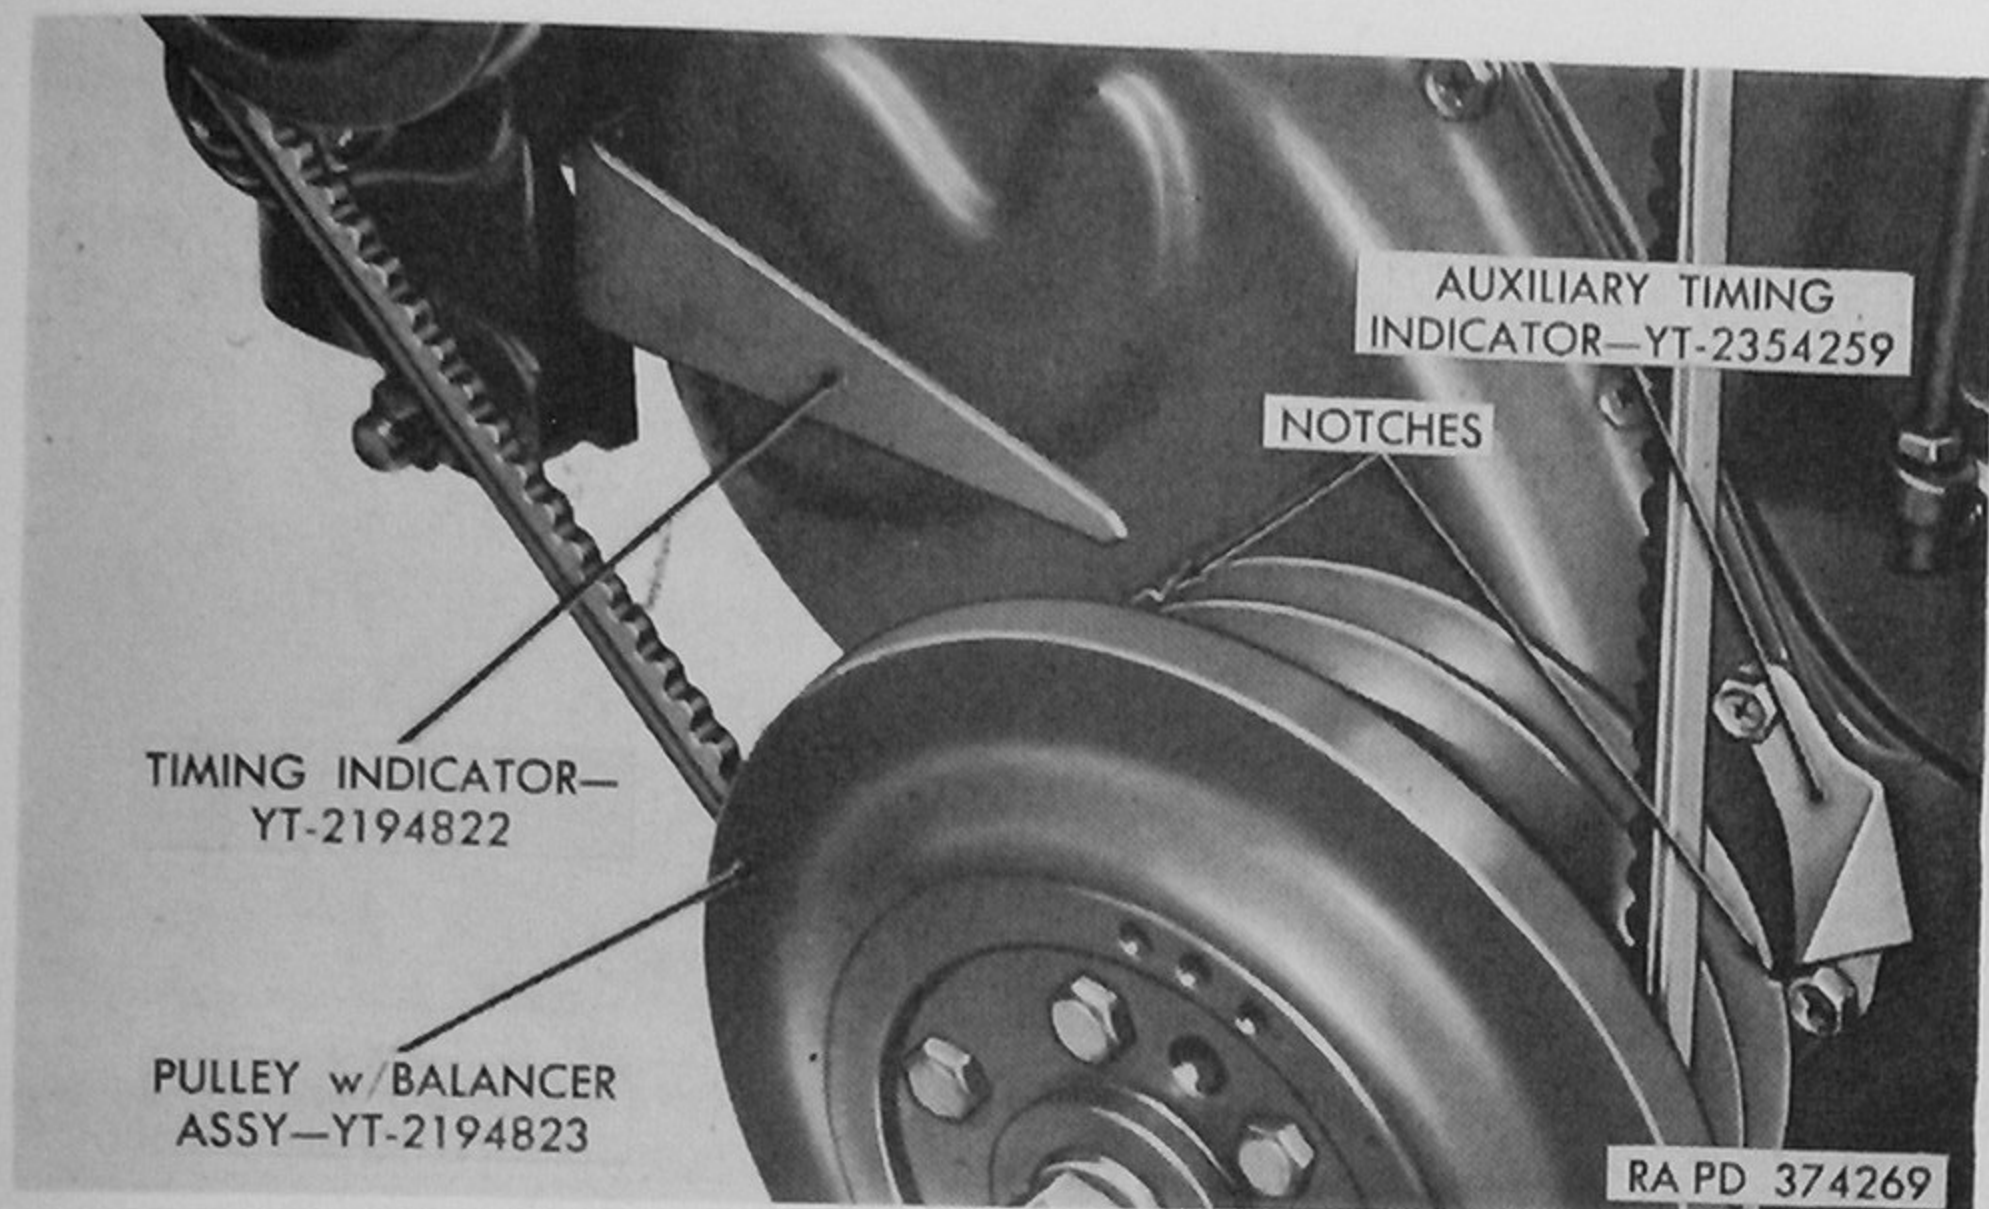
Location of timing notches on crankshaft pulley—engine assembly 8329440.
